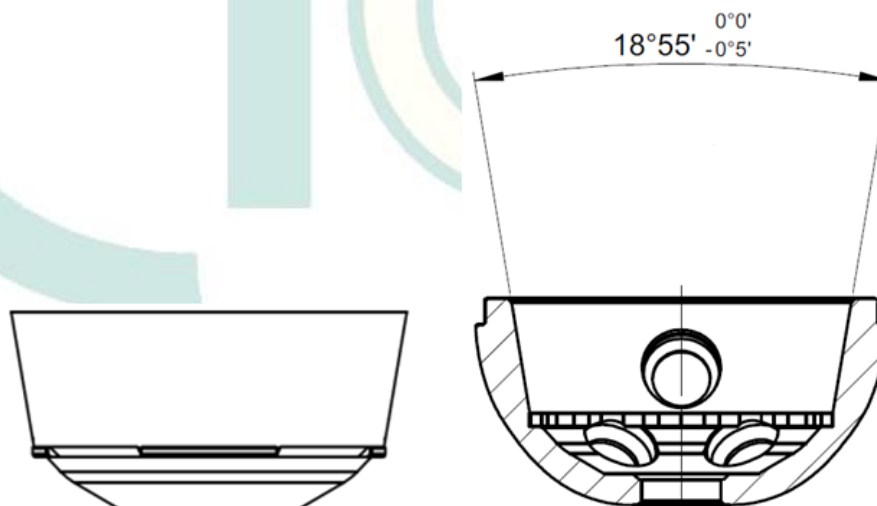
SHELL – LINER CONICAL TAPER FIXATION (LINER LEFT; SHELL RIGHT)
